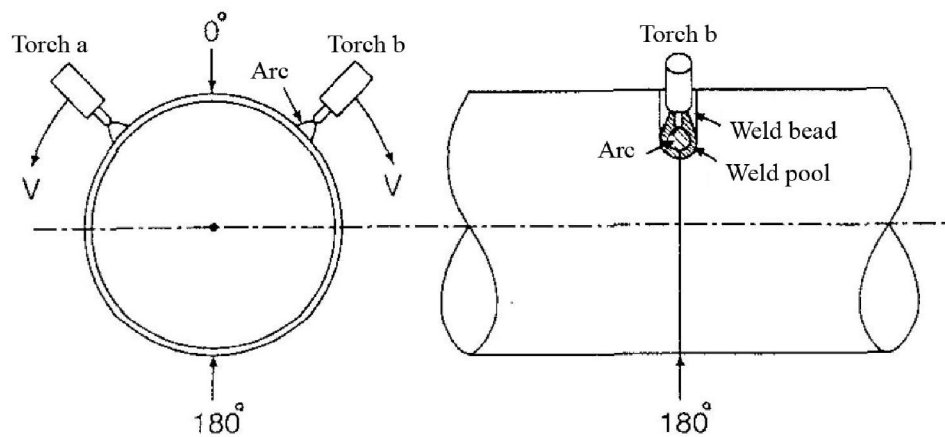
Outline of circumferential GTA welding of steel pipe [221]
